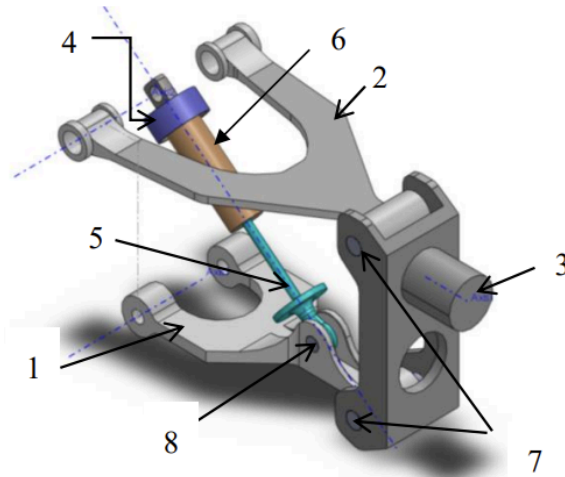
Isometric rendering of the simplified rear suspension assembly with parts labeled.
